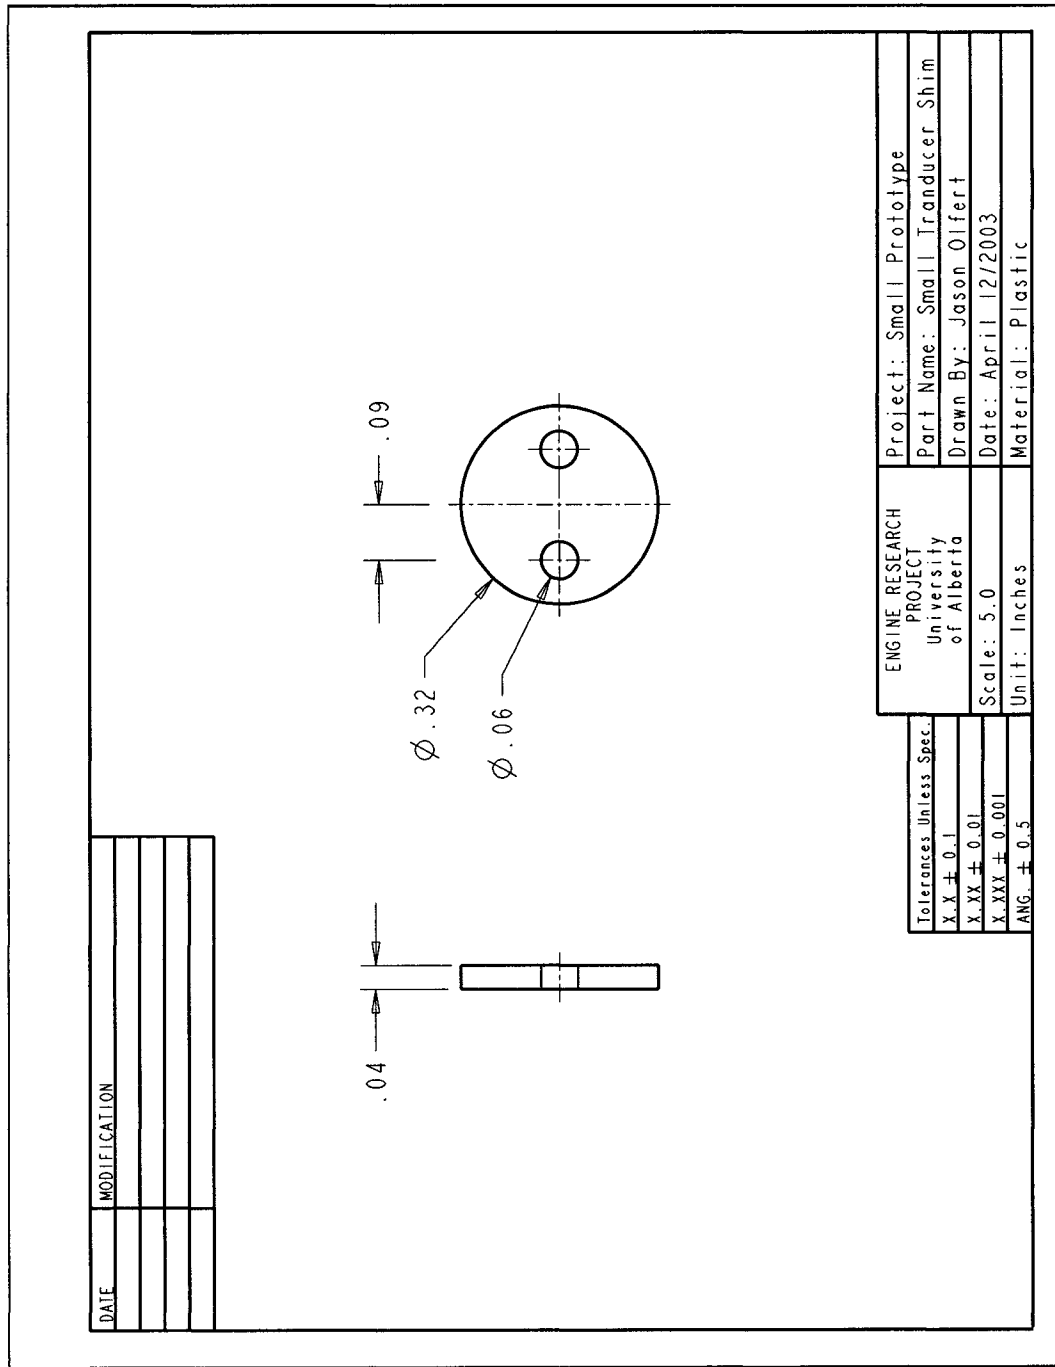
Drawing of Small Transducer Shim of Small Prototype
